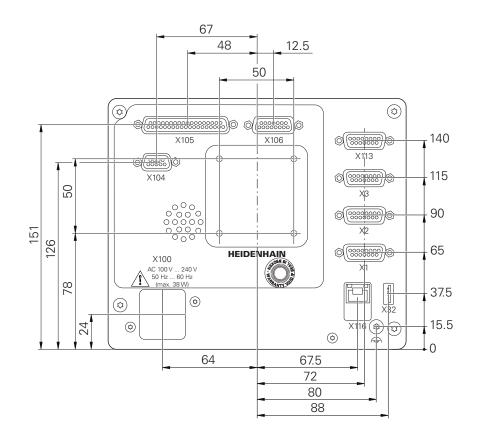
Dimensions of the rear panel for devices with ID 1089179-xx
